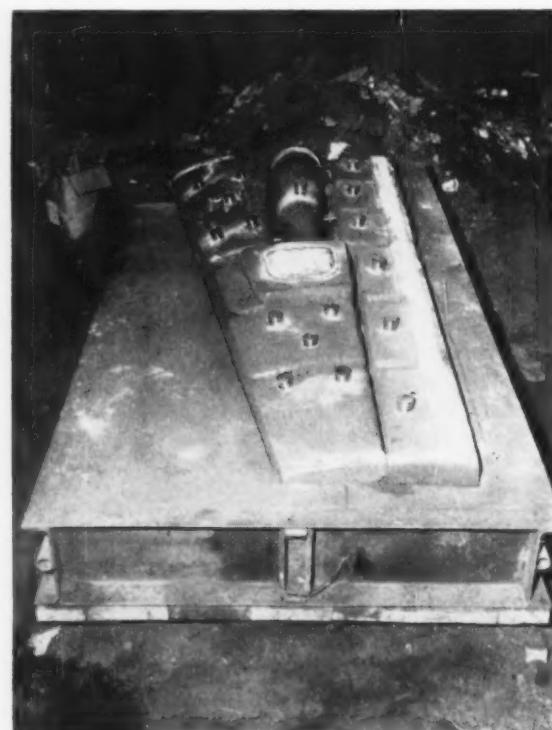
Preventing core shifts on leading edge castings was special problem. Drag side of large green-sand mold shows type and positioning of specially designed aluminum bronze chaplets.
